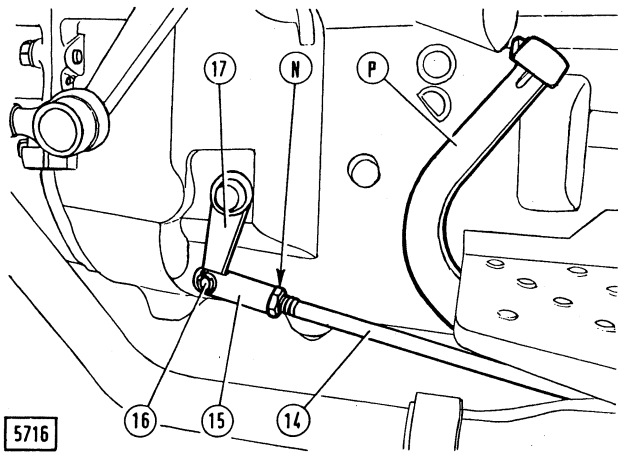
Adjusting the free pedal travel of the 10" clutch.
